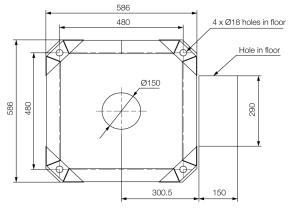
Exhaust valve seat and spindle grinder
